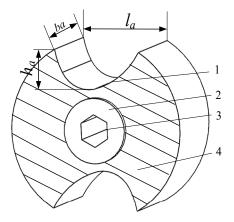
Sketch of the structure of the fertilizer application type hole wheel: 1. Type hole; 2. Rotary shaft; 3. Shaft holes; 4. Type hole support body.
